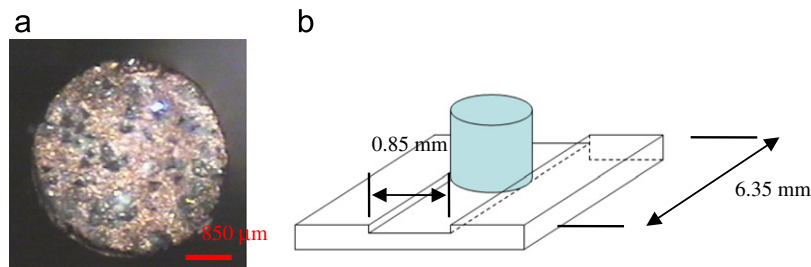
Microgrinding operation (a) top view of the microgrinding tool and (b) end grinding configuration.
